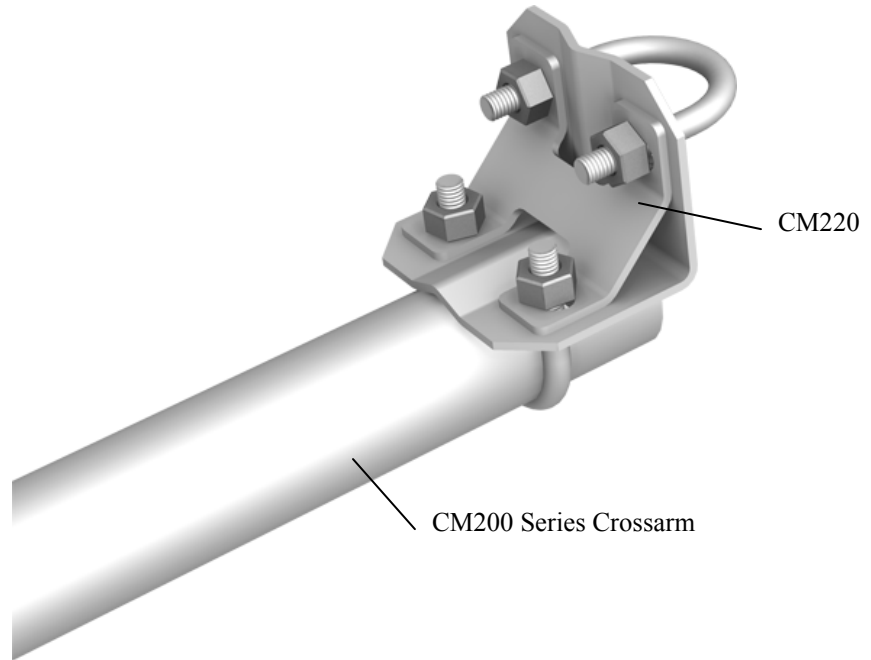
CM200 Series Crossarm with CM220 Right Angle Mounting Bracket
